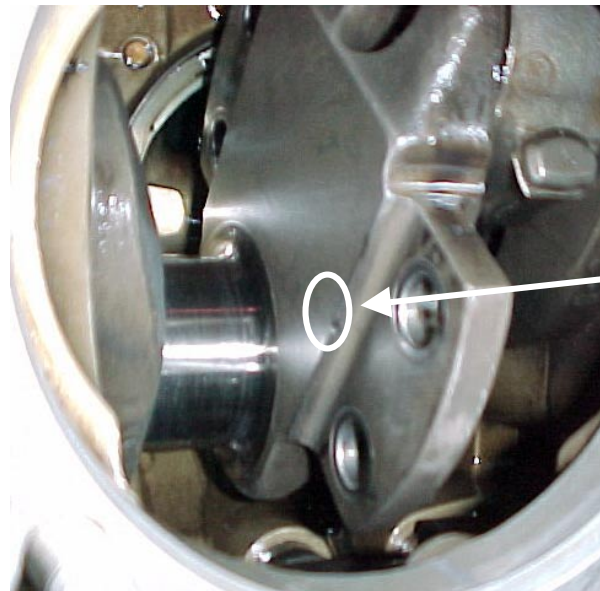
CRANKSHAFT COUNTERWEIGHT PARTIALLY REMOVED
